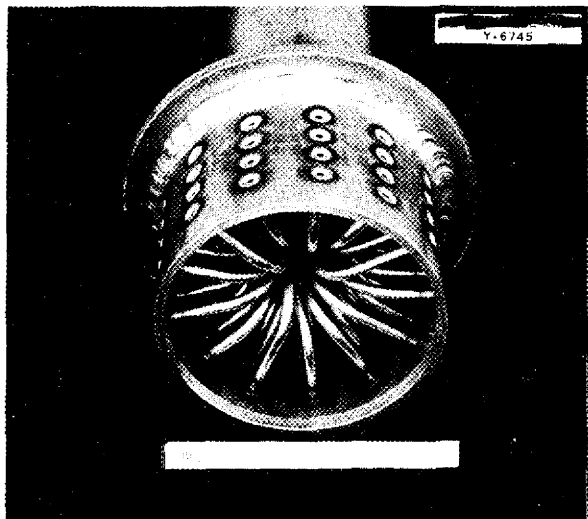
One End of A cone-Arc-Welded Inconel Heat Exchanger Assembly.
